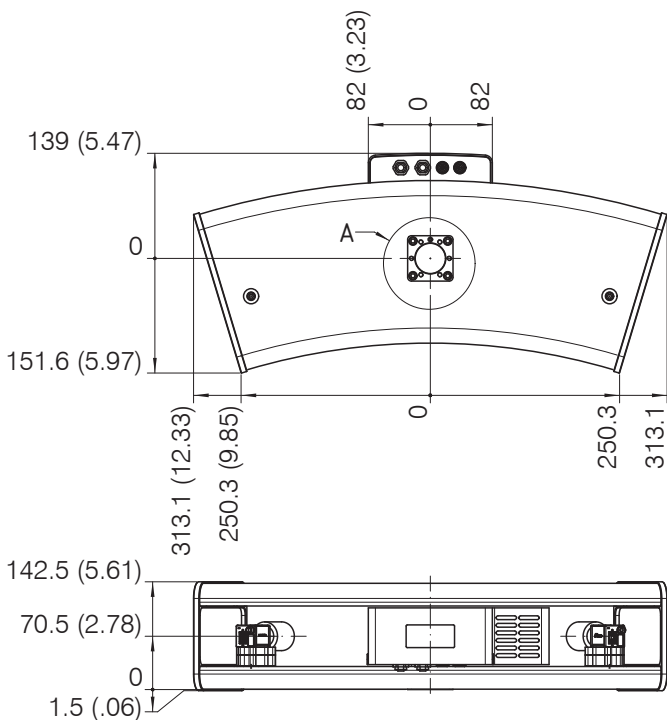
Dimensional drawing of surfaceCONTROL 3D SC25x0 sensor, dimensions in mm (inches, rounded off)
